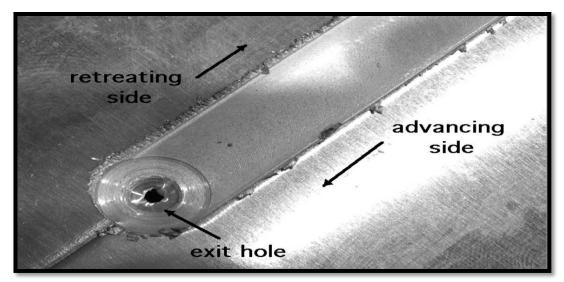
Exit hole at the end of the welding line in FSW [26].
